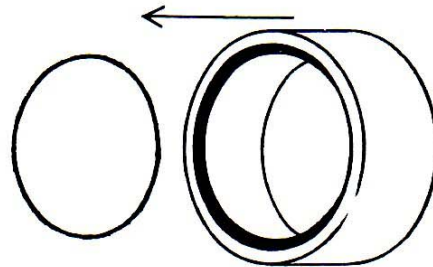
Fitting direction of drive sprocket spacer
